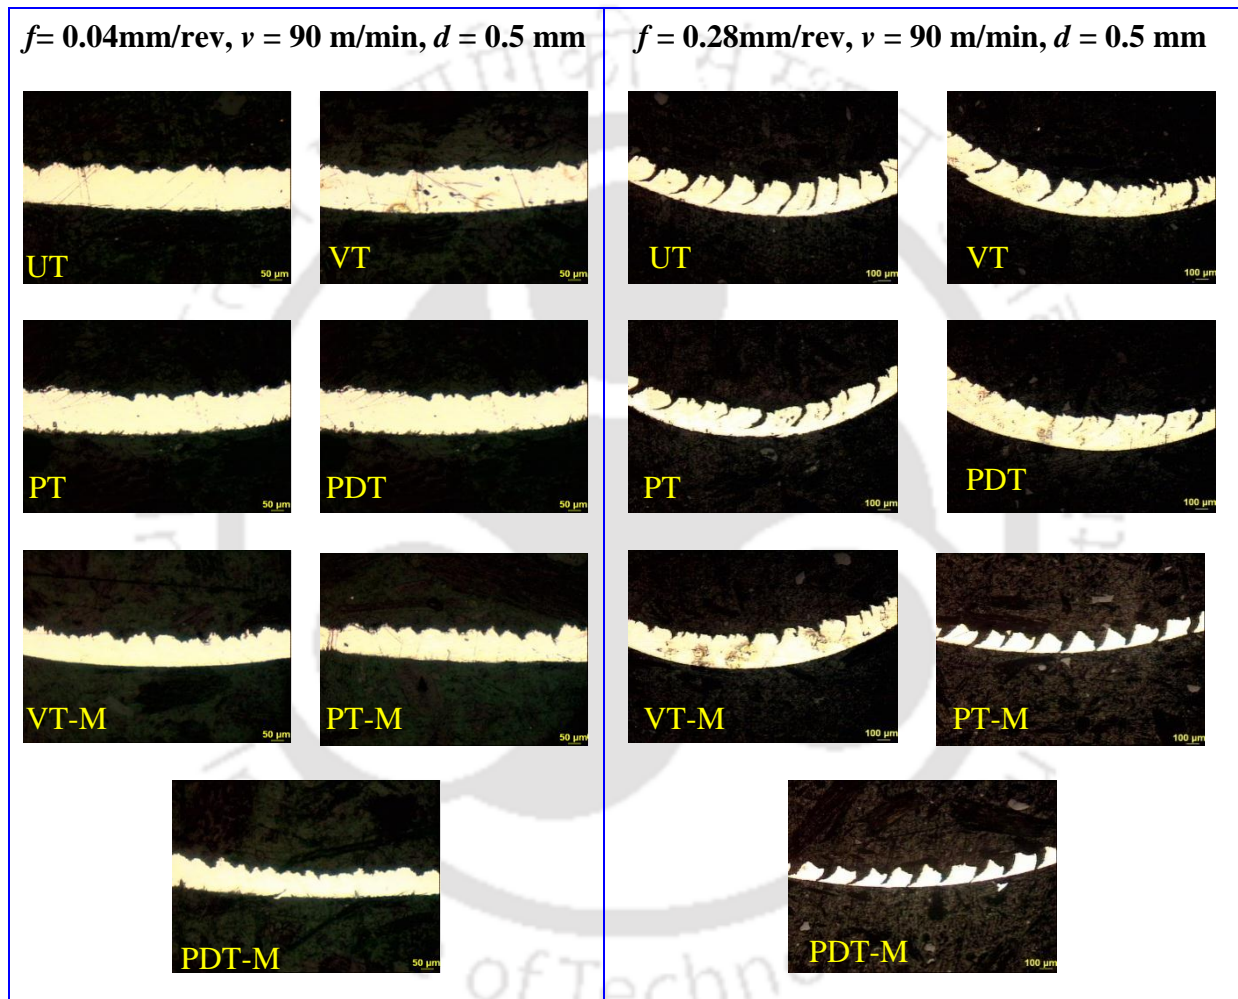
Chip morphologies of AISI H-13 tool steel machined with various cutting tools at cutting speed $v = 90\text{m/min}$, depth of cut $d = 0.5\text{ mm}$ with two different feed $f = 0.04$ and 0.28 mm/rev
